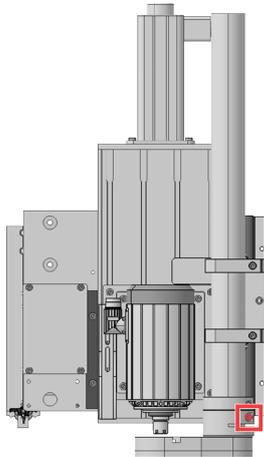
FASTENING THE SCREW OF THE SUCTION SHOE
